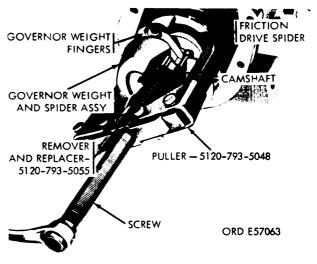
Removing governor weight and spider assembly using puller 5120-793-5048 and remover and replacer 5120-793-5055.
